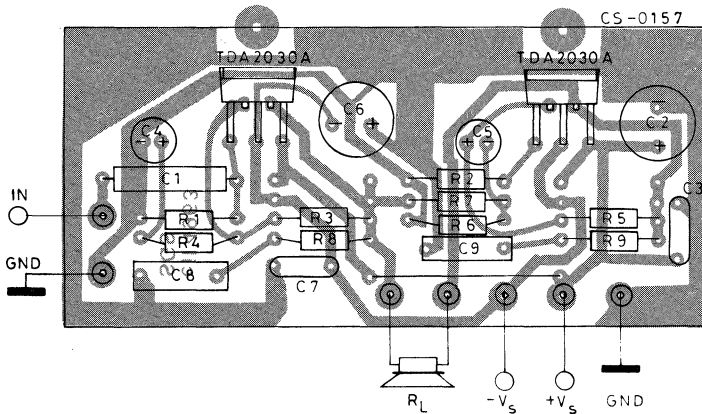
P.C. board and component layout for the circuit in fig. 17 (1:1 scale)
